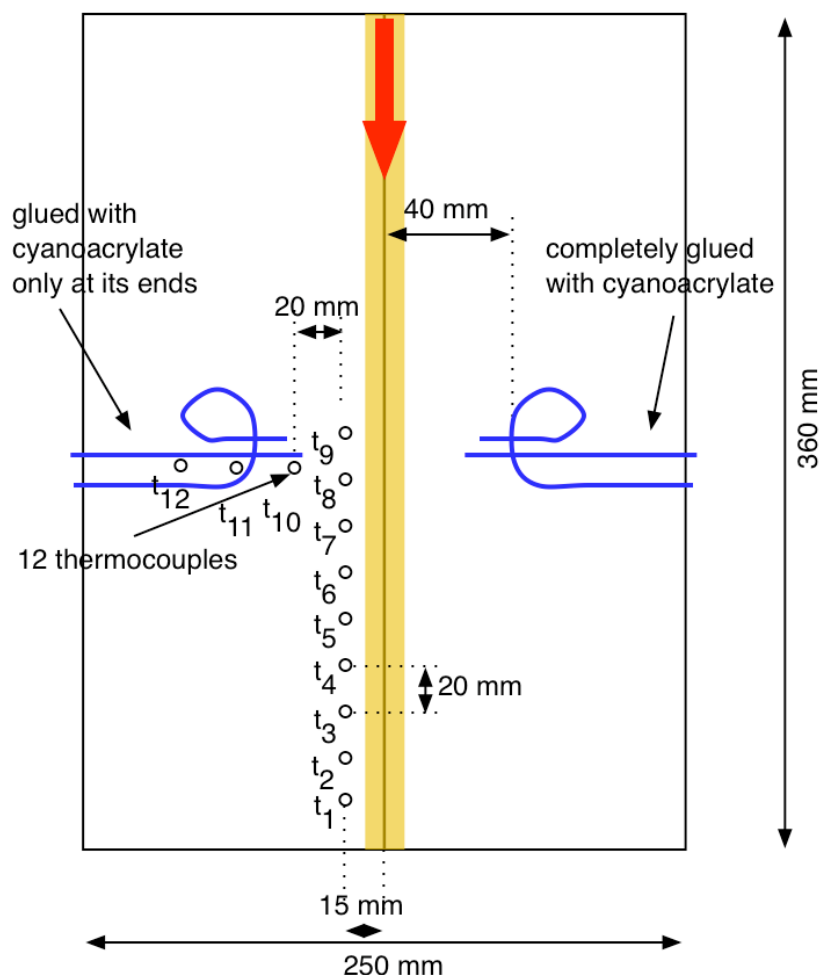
instrumentation for comparison between two gluing methods - MIG welding
